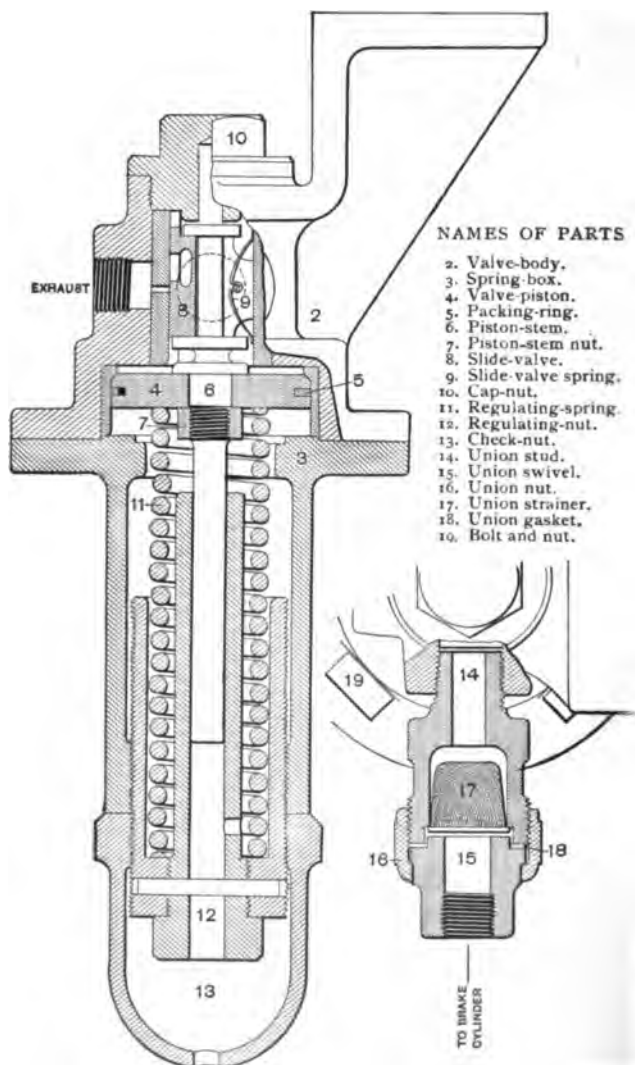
AUTOMATIC PRESSURE REDUCING-VALVE.
